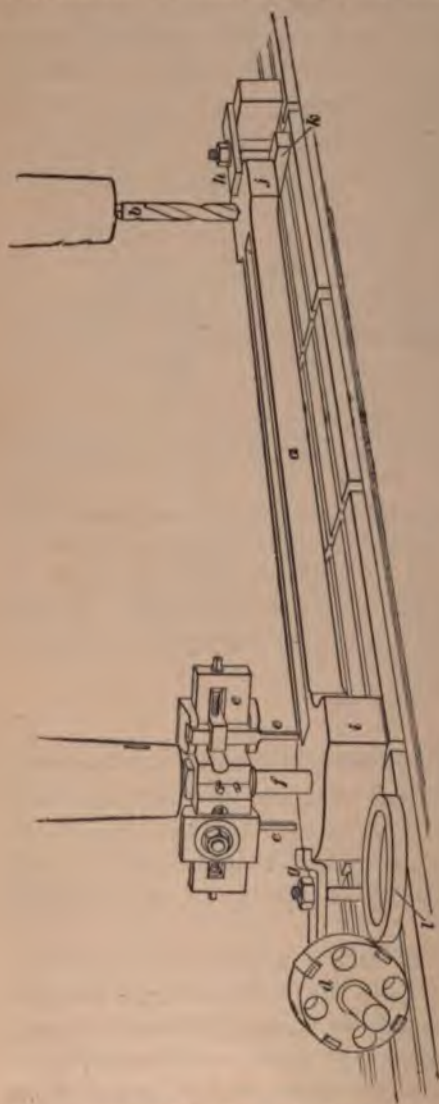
shows the table of such a machine with a connecting-rod *a* fastened upon it. In the illustration, the one spindle is fitted with a drill *b* to form a guide hole for the pin *f* of the annular cutter, while the other spindle is equipped with an annular cutter *c*, as described in Art. 36, *Drilling and Boring*, Part 1, with two tools *e, e* to remove the body of
